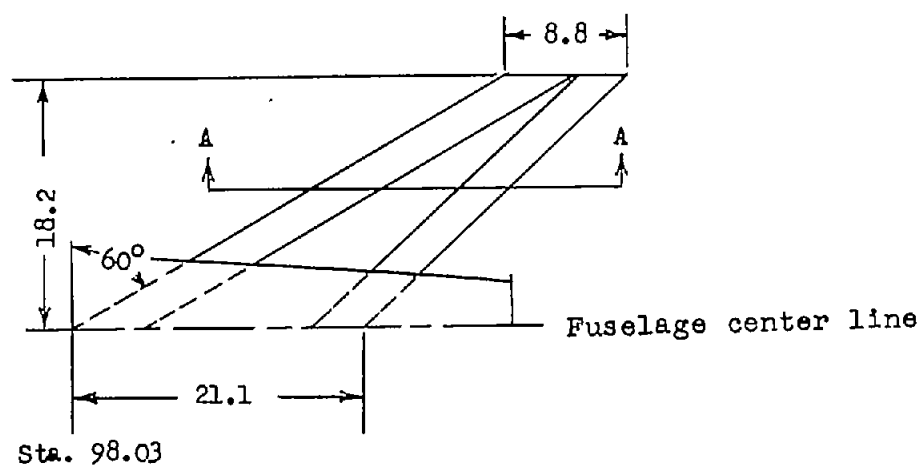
Detail of typical stabilizing fin. All dimensions are in inches.
